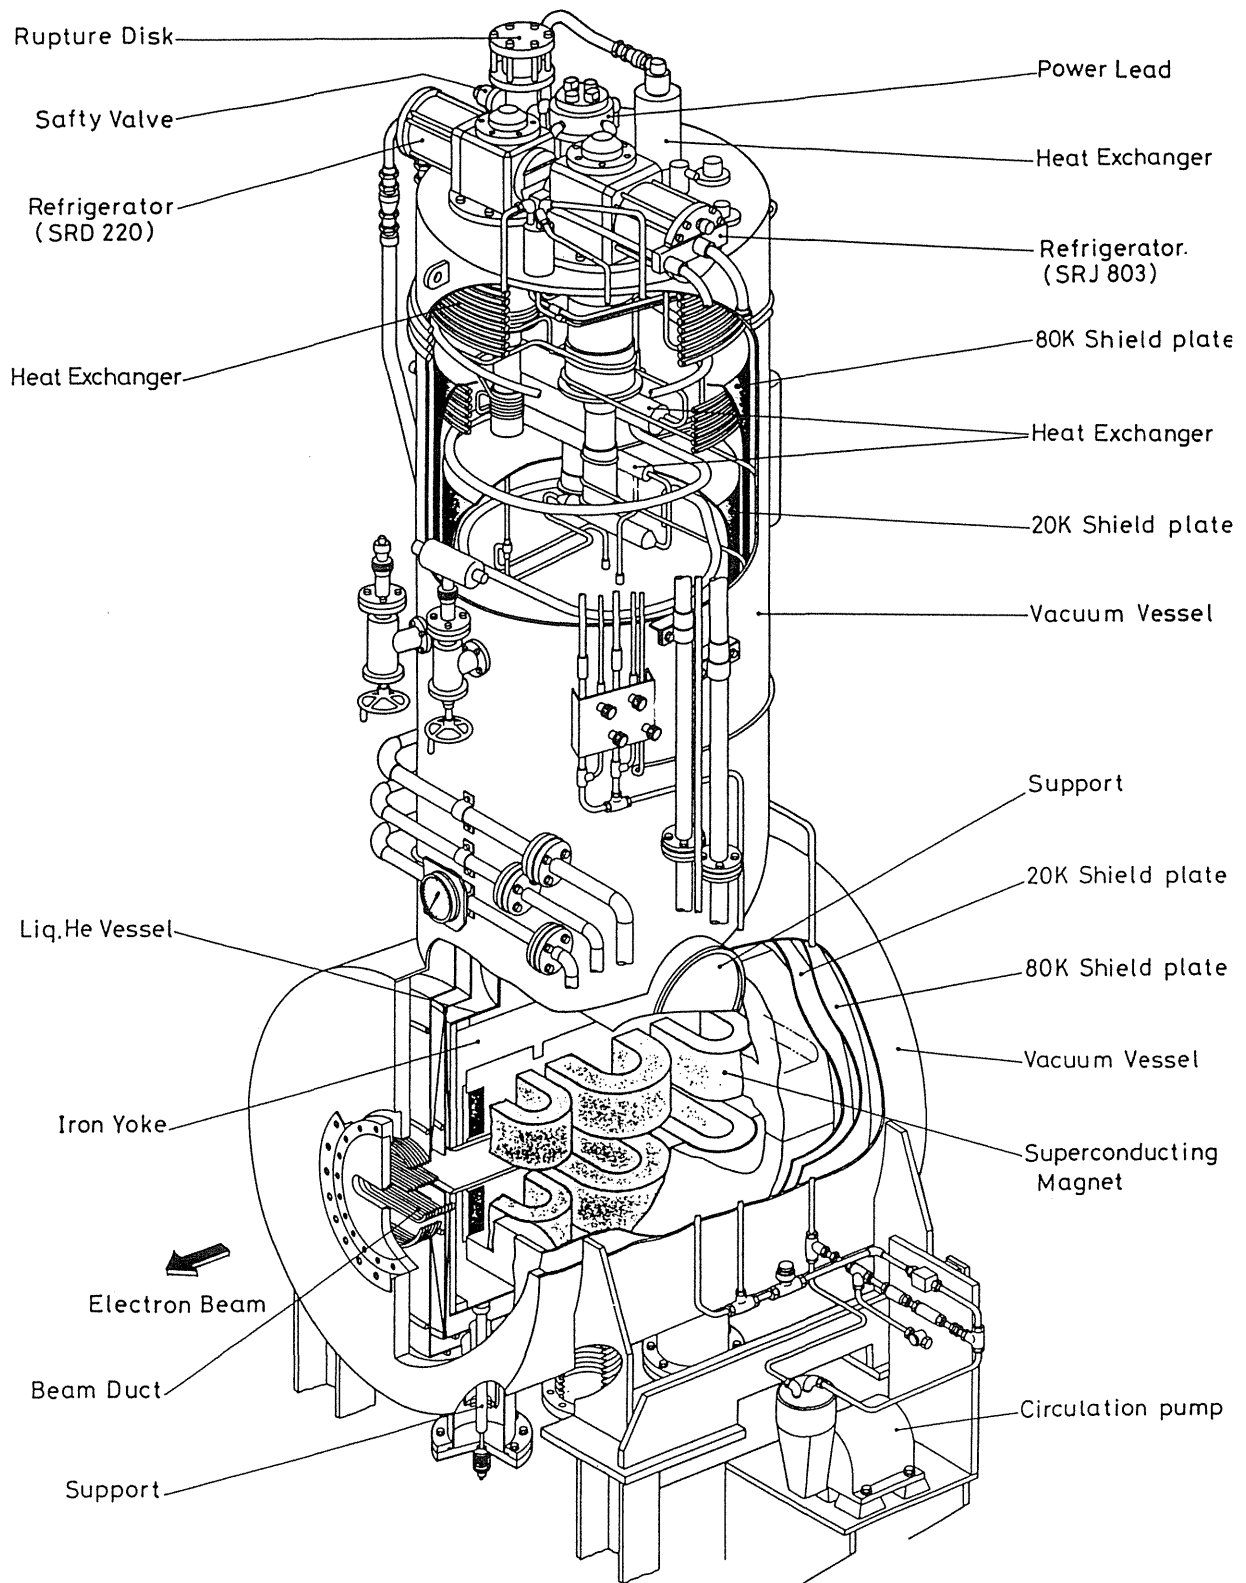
Three-dimensional drawing of the superconducting wiggler.
